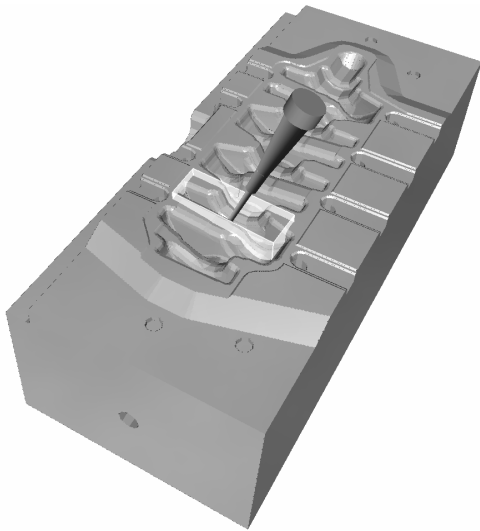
Car crankshaft mould with one area marked at the cavity selected for the tool path conversion.
